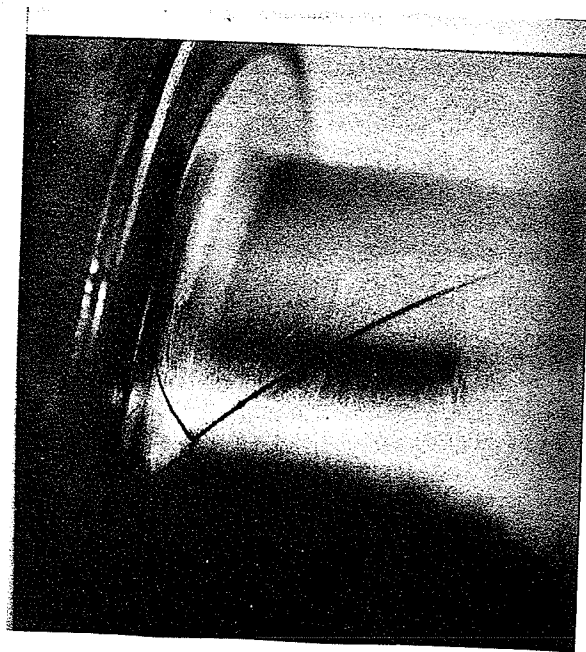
Crack formation at the base of a fillet during a reversed torsional fatigue test (10)
